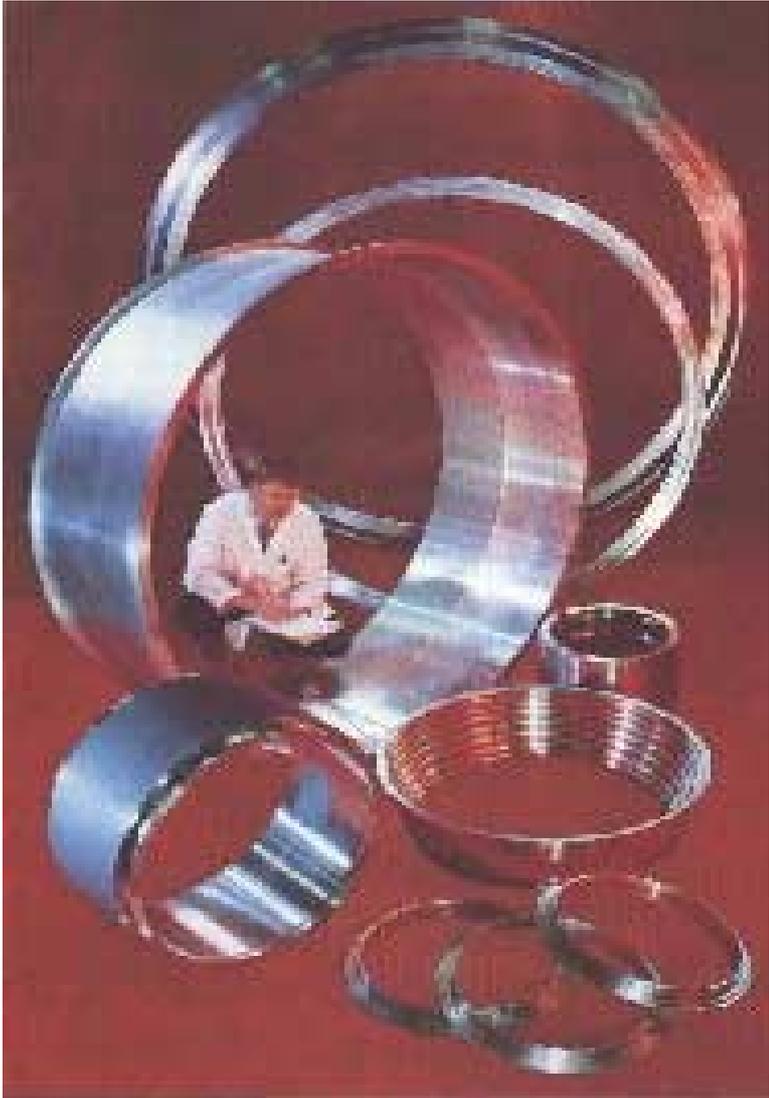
A selection of ring sections made by forging, ring rolling and machining.
